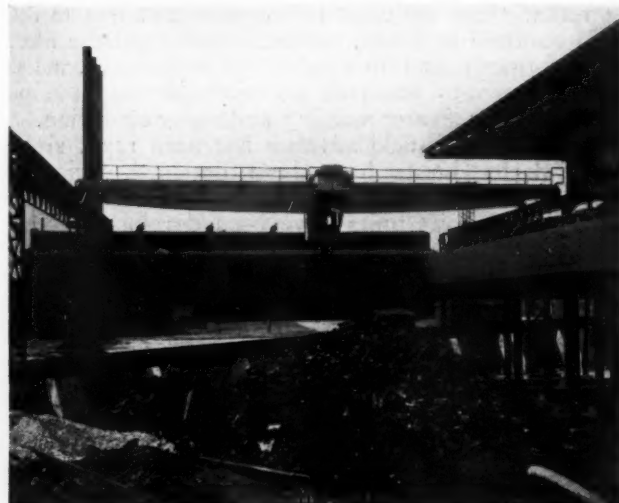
ELECTRIC TRAVELING CRANE EQUIPPED WITH TWO ELECTRIC LIFTING MAGNETS HANDLING PIG IRON AND SCRAP IN A FOUNDRY YARD
